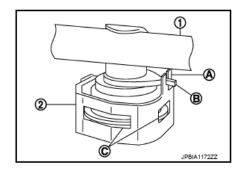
Identifying Cut-Out Of Clip And Fuel Tube Courtesy of NISSAN MOTOR CO., U.S.A.
